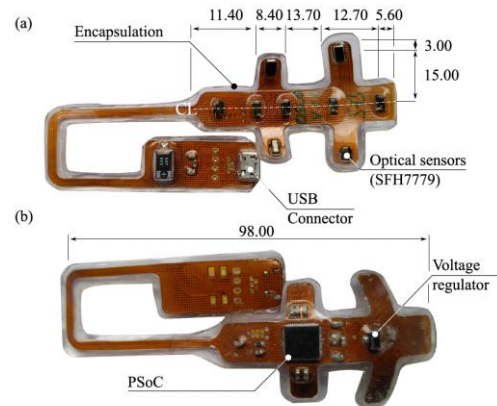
Display of the device. (a) front view, showing the optical sensors and the dimensions (in millimeter), (b) back view, showing the PSoC control chip and the voltage regulator. The USB connector is bent inwards solely to save space and thus cost on the printed circuit board.
